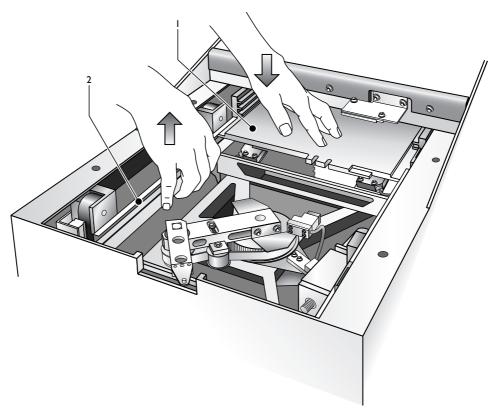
Handling the adjustment carrier (ACM tray trolley shown)
